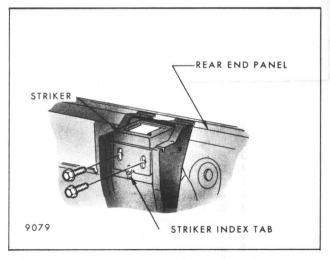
Typical Rear Compartment Lock Striker Mounted in Rear End Panel
